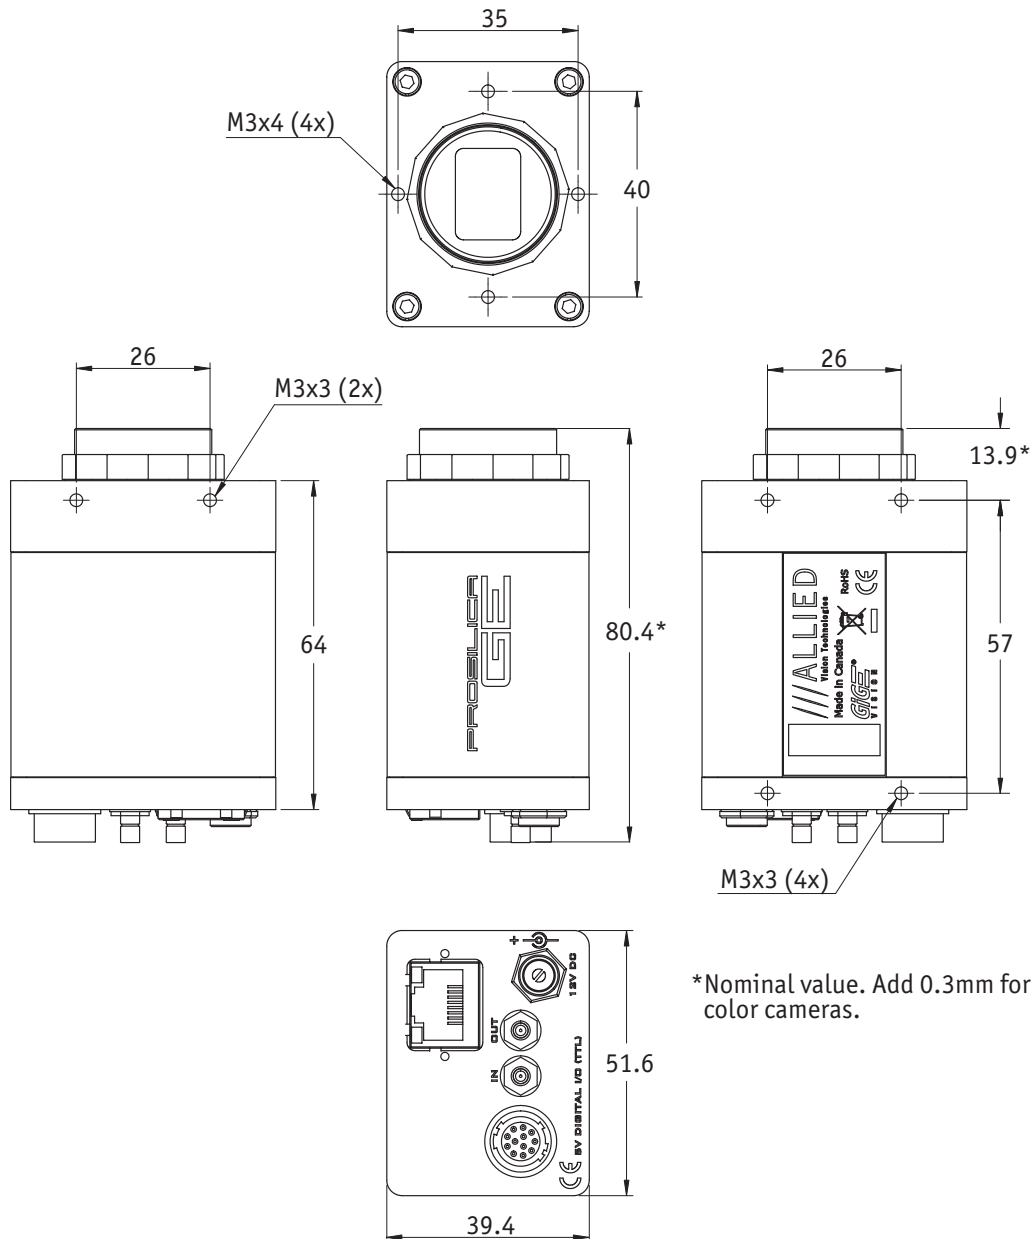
Prosilica GE680 adjustable C-Mount mechanical dimensions
